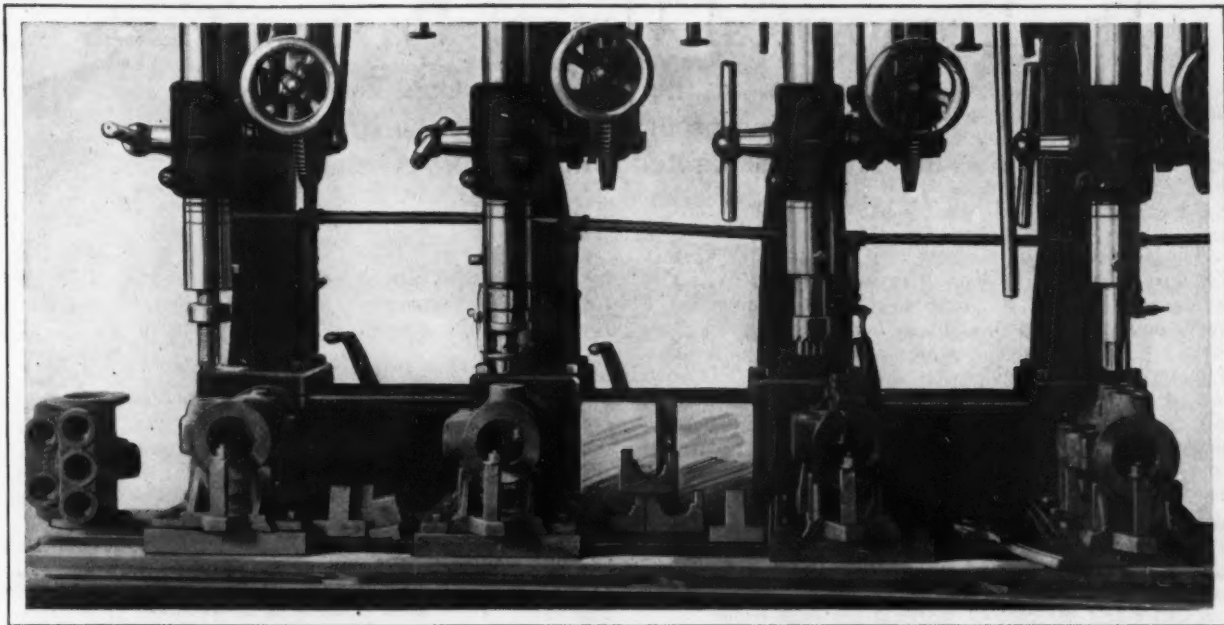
Gang Drilling Machine for Boring, Facing and Tapping Pump Castings
